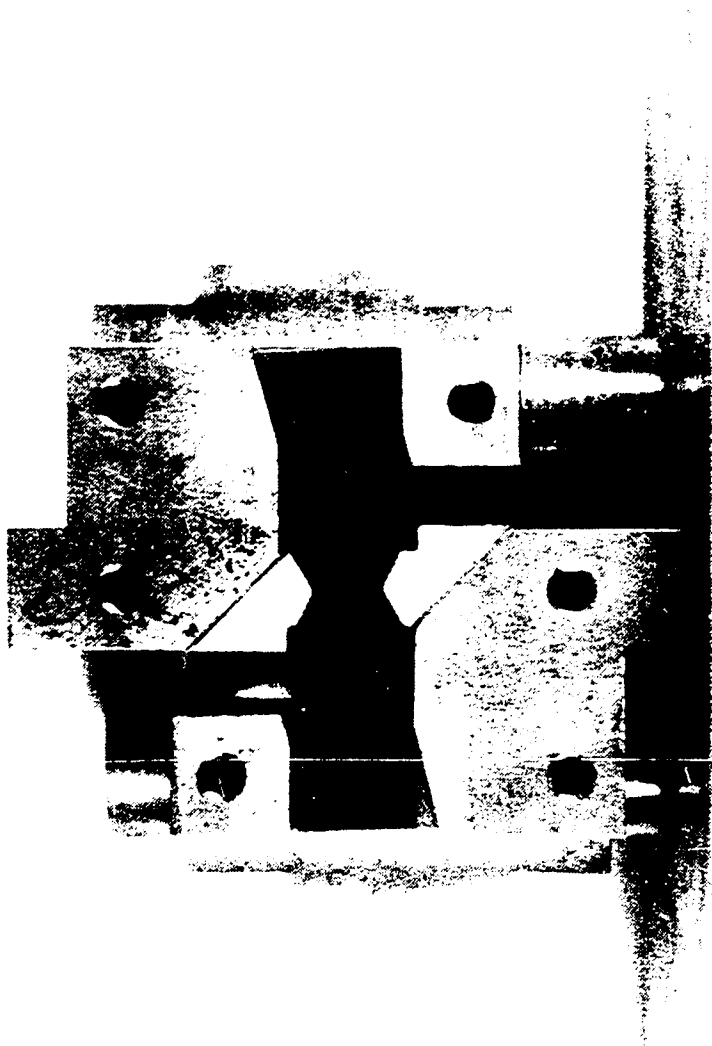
Specimen set in the Iosipescu Shear test fixture.
